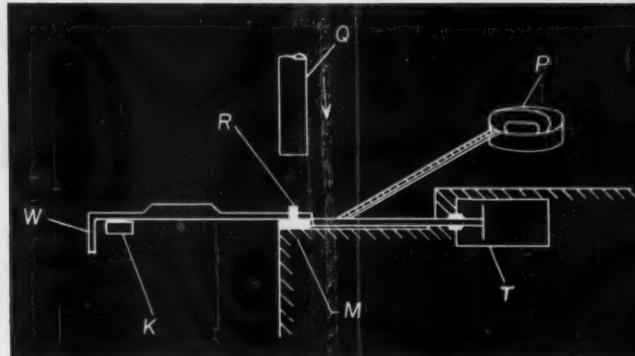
Marriage of spring (W) with hole finding the rivet (R) on anvil (M). Air cylinder (T) delivers rivet from track of vibratory hopper (P). Hammer (Q) upsets rivet shank.
